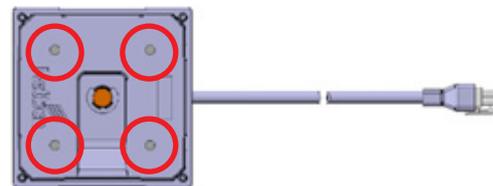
Attaching the LegaMove lifting column (large end plate shown)
